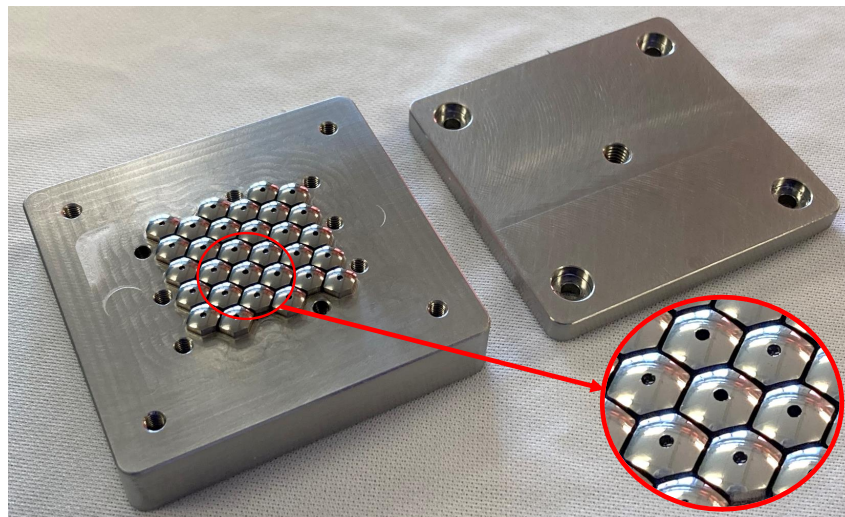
Photograph of the final manufactured mold, showing a close-up view of 7 units.
